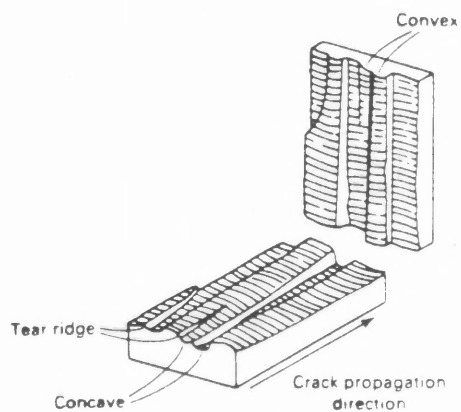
Schematic illustrating fatigue striation on plateaus.
